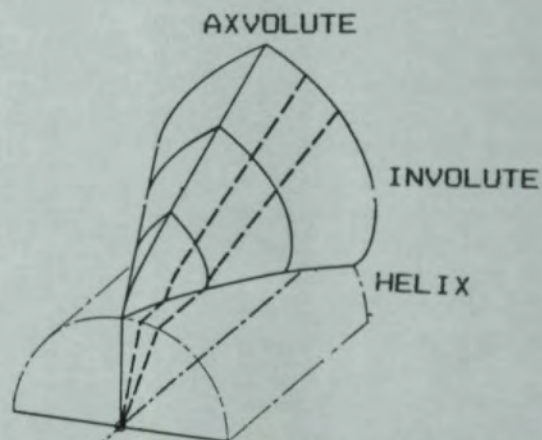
Spur Taper Gear Tooth - Complex Helicoid
